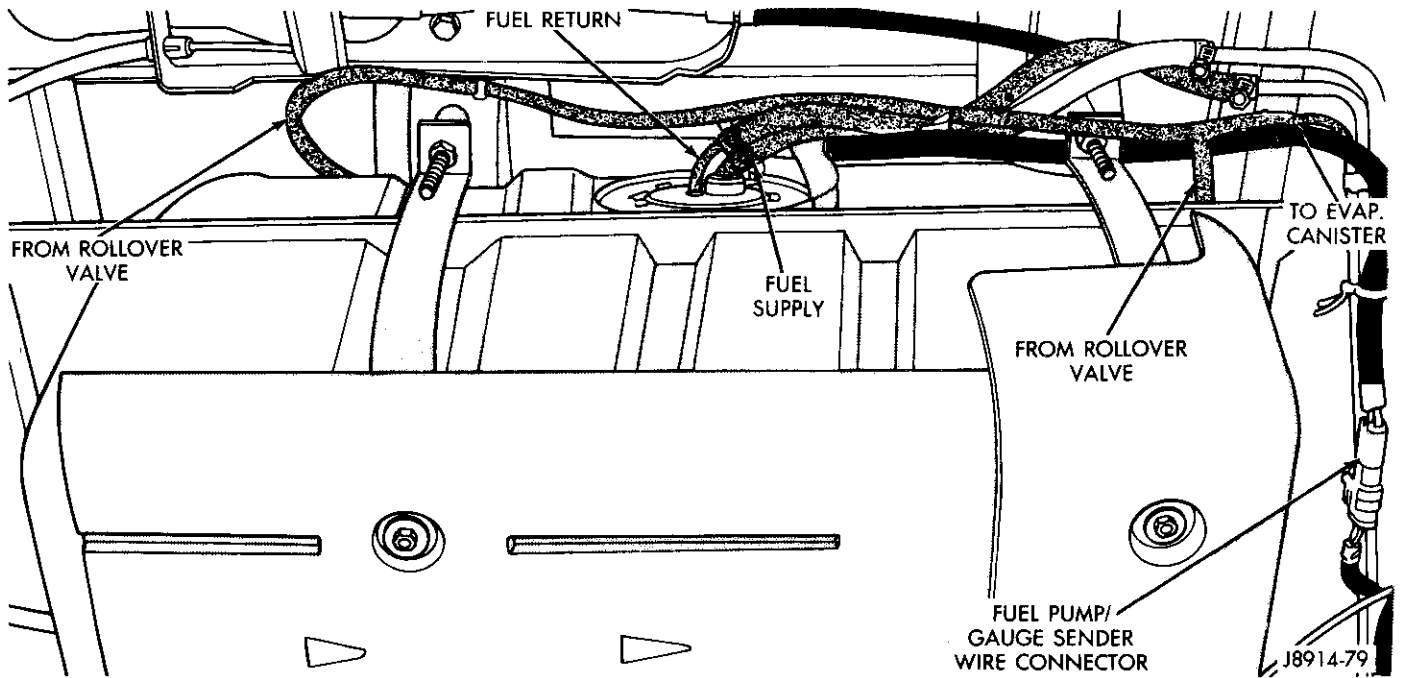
Fuel Pump and/or Gauge Sender Unit Connector and Fuel Tank Hoses—Typical
